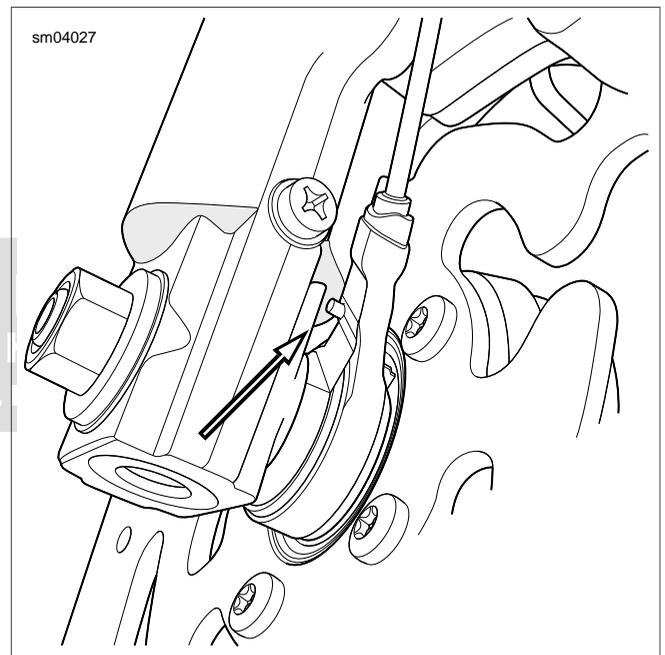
Front Wheel Speed Sensor Index Pin (ABS Equipped)
